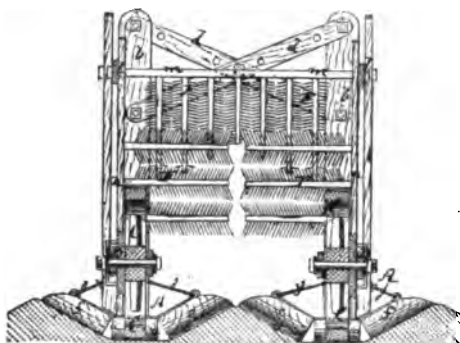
HELM BRUSHING-MACHINE: transverse section.
